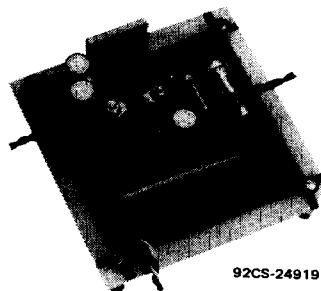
Bottom view of printed-circuit boards shown in Figs. 7 and 8.
